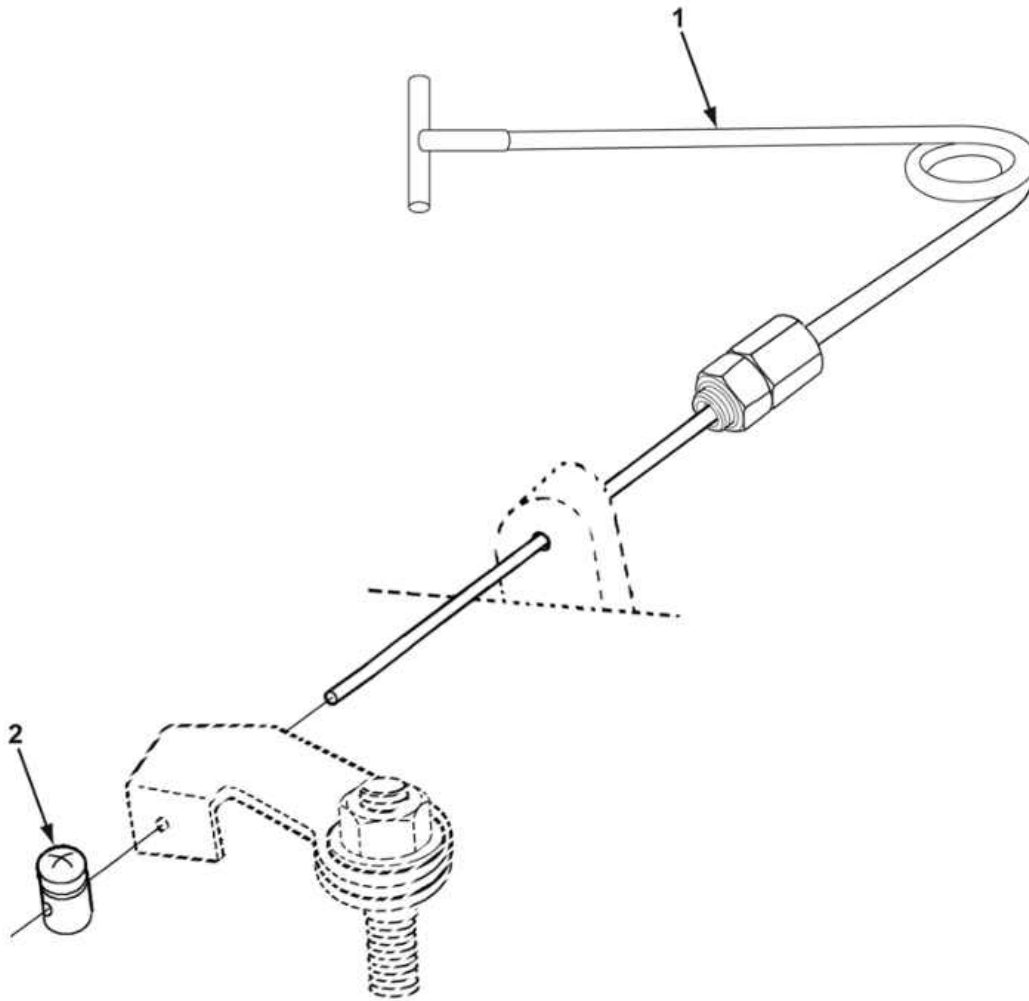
ENGINE THROTTLE ASSEMBLY
